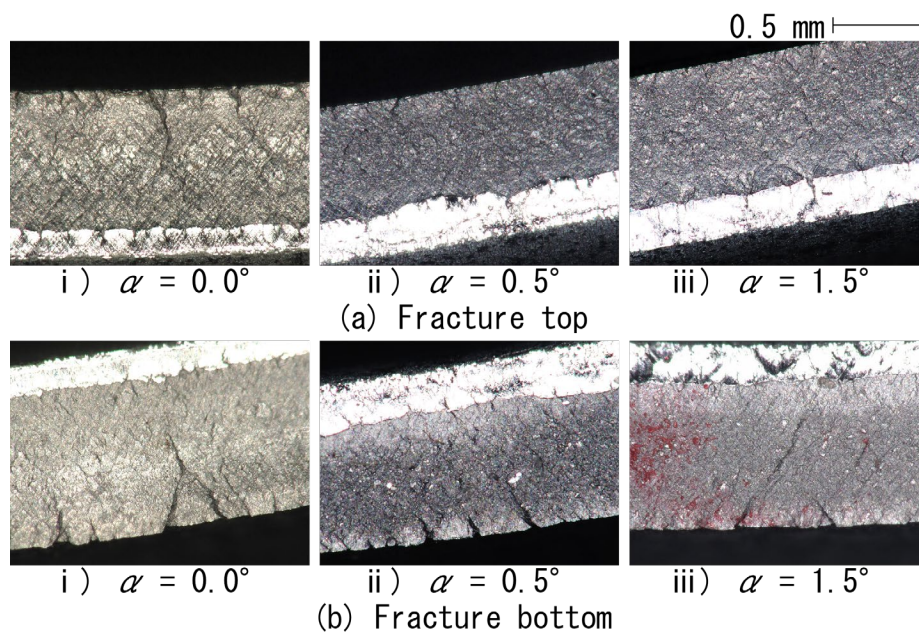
Edge cracks after stretch flanging with  $l = 45 \text{ mm}$ .
